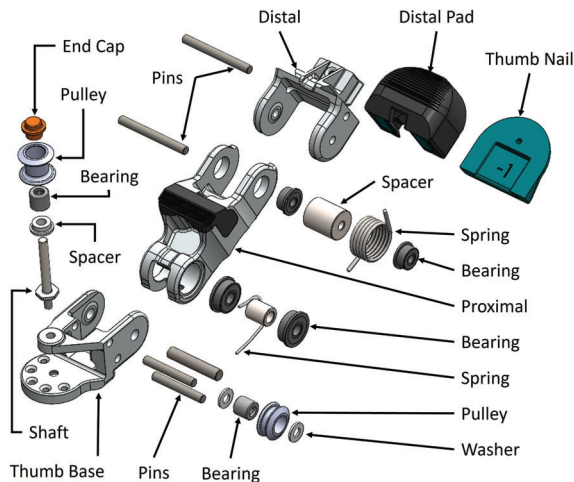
An exploded view construction of the thumb. A modular distal pad and thumbnail allows the tip of the finger to be easily altered. Bearings are used to reduce friction in the joint, and torsional springs provide passive extension. Pulleys within the thumb reduce friction and enable rerouting of the thumb tendon.
